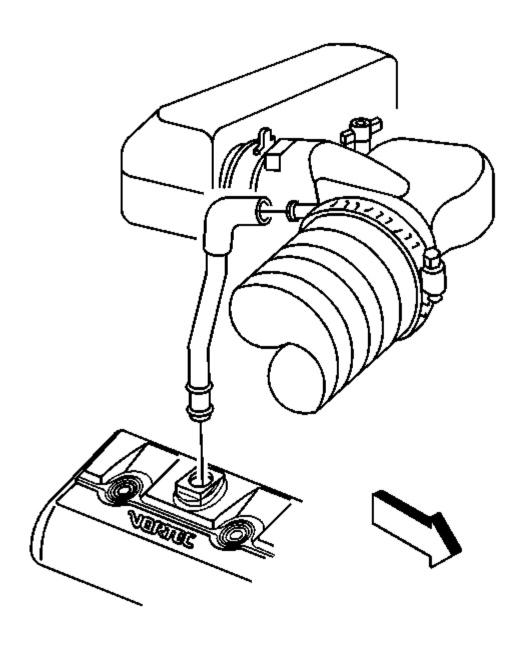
Identifying PCV Hose Courtesy of GENERAL MOTORS CORP.
